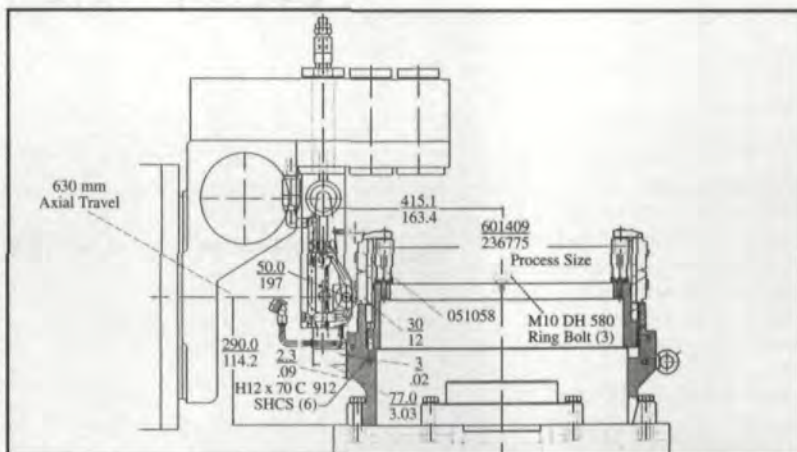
Layout of external grinding setup for 200-tooth, external ring gear spline shown in Fig. 1. Note the location of the grinding arm position on the grinding head relative to Fig. 3. The arm has been rotated for external grinding. The internal spur and helical grinding head can be used, with properly designed arms, for doing both internal and external work.
